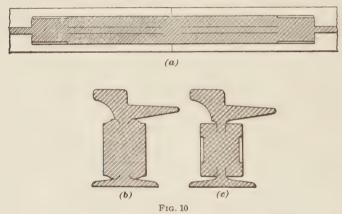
(a) shows a horizontal section of a completed joint; (b) and (c) show vertical sections, (b) being a section of the center weld and (c) of an end weld.
